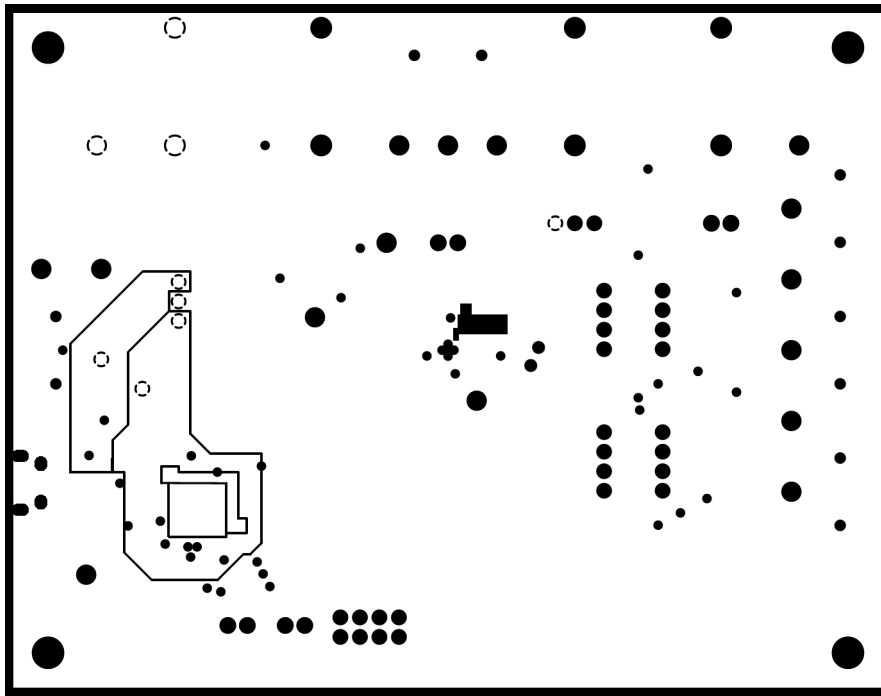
DAC8831EVM PCB Mid Layer 2 Layout (Power Plane)
